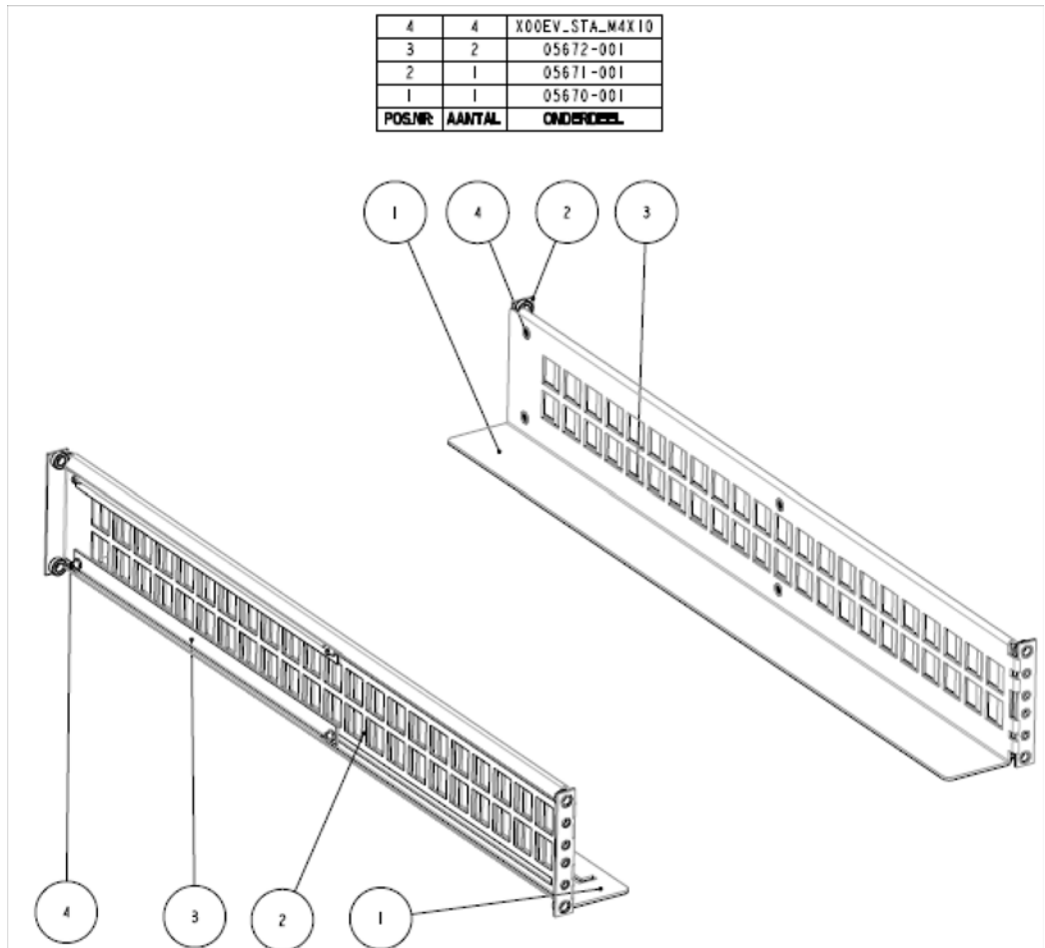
Installing the Rack-Mount Rail Kit Rail Assembly, Left Side Shown
